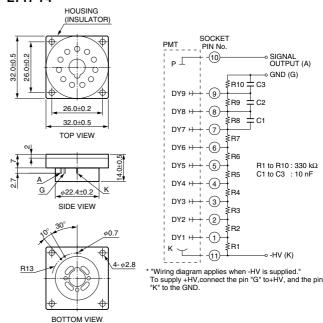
D Type Socket Assembly (Unit: mm) Sold Separately
